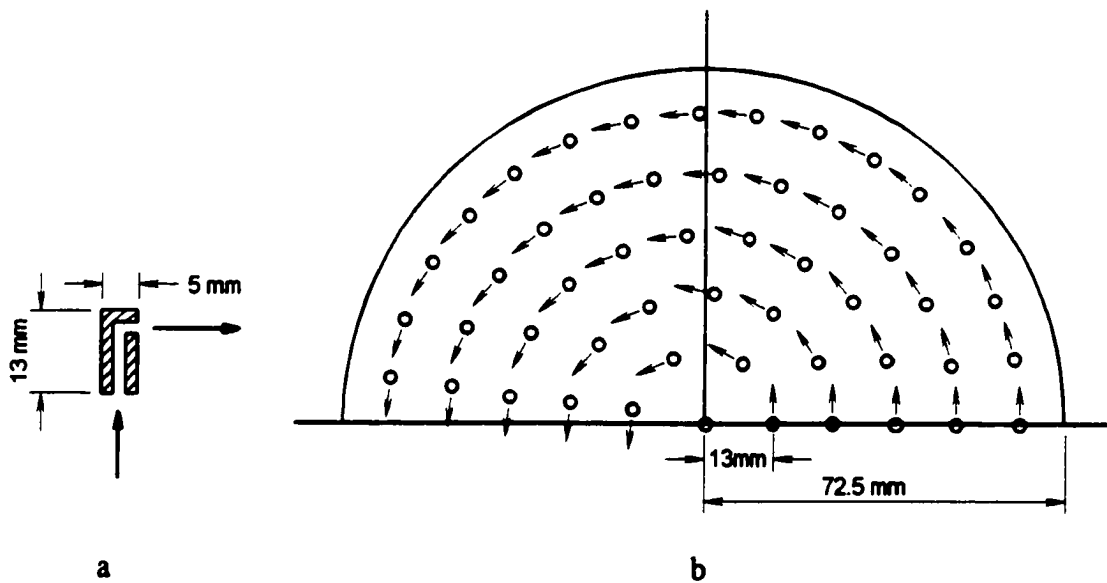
(a) Cross section of a tuyere, (b) Half hole layout of the distributor plate and gas outlet direction.
